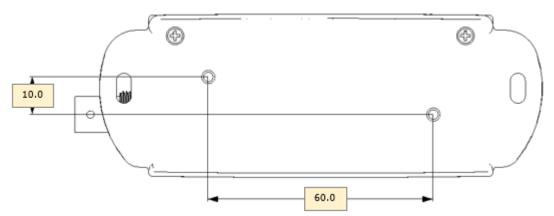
LDSBus EC Sensor Adapter Dimension – Bottom View
